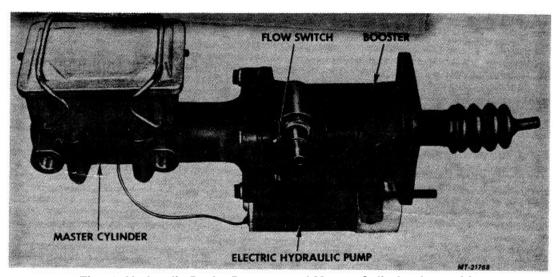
Hydraulic Brake Booster and Master Cylinder Assembly
